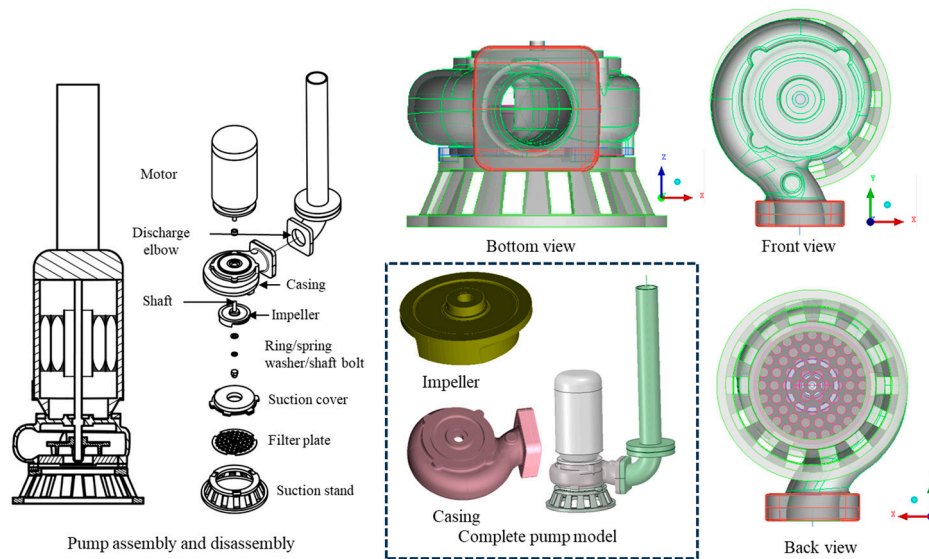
Assembly and disassembly drawing of the submersible drainage pump (DWE-08B) and its different views.
